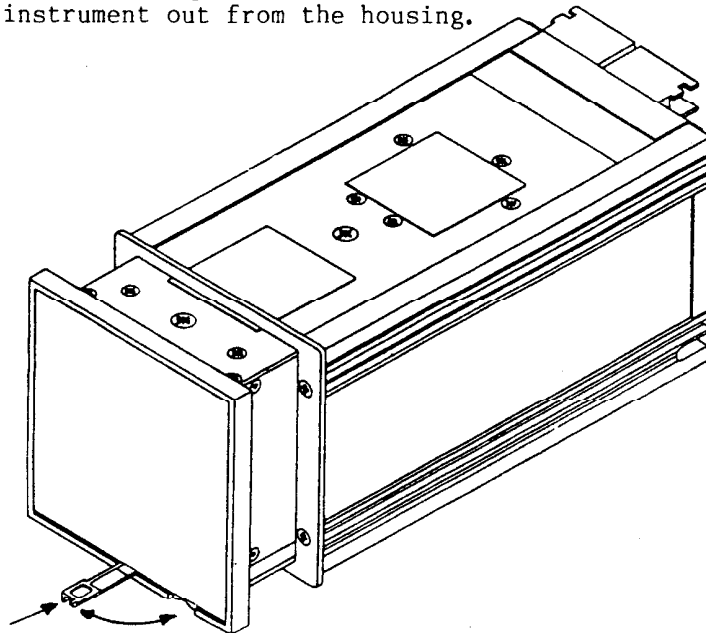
REMOVAL AND REPLACEMENT OF 2077 WITHIN HOUSING
